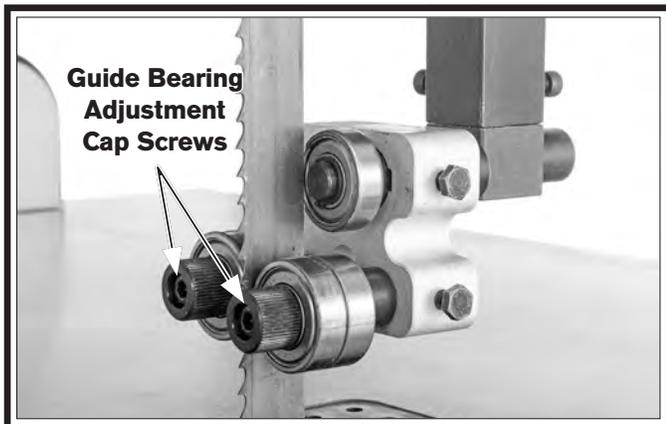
Location of upper guide bearing adjustment cap screws (guide post cover removed for clarity).
